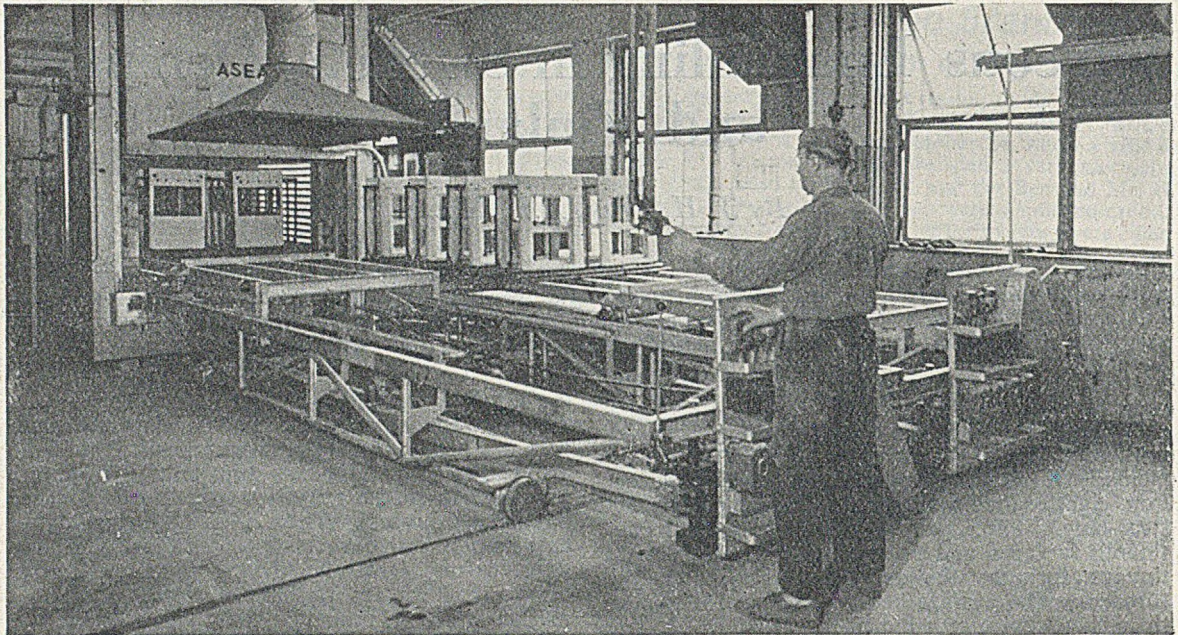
Typical Box-type Furnace, showing the Ware being hung and a Heat Extractor above the Furnace Charging Machine.
